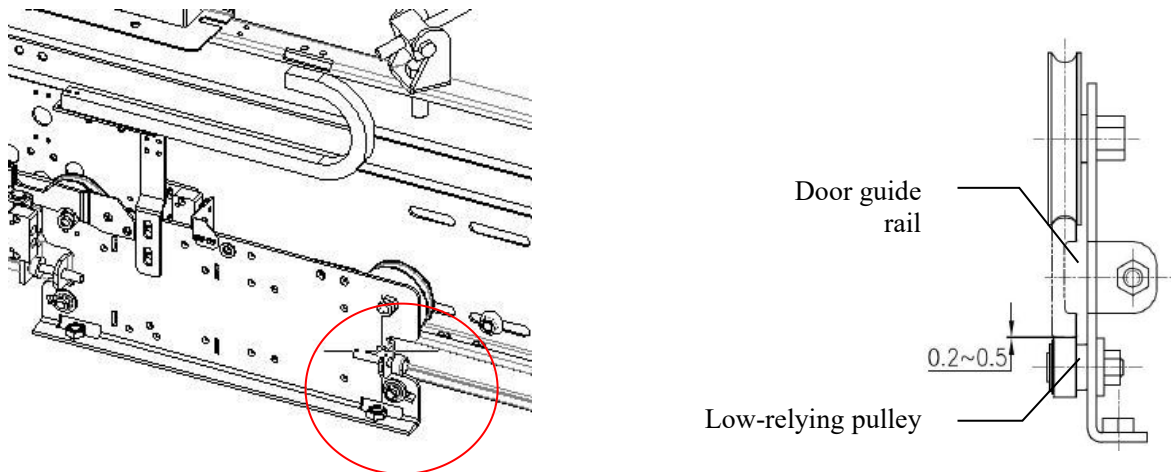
Adjustment of hanging plate low-relying pulley
